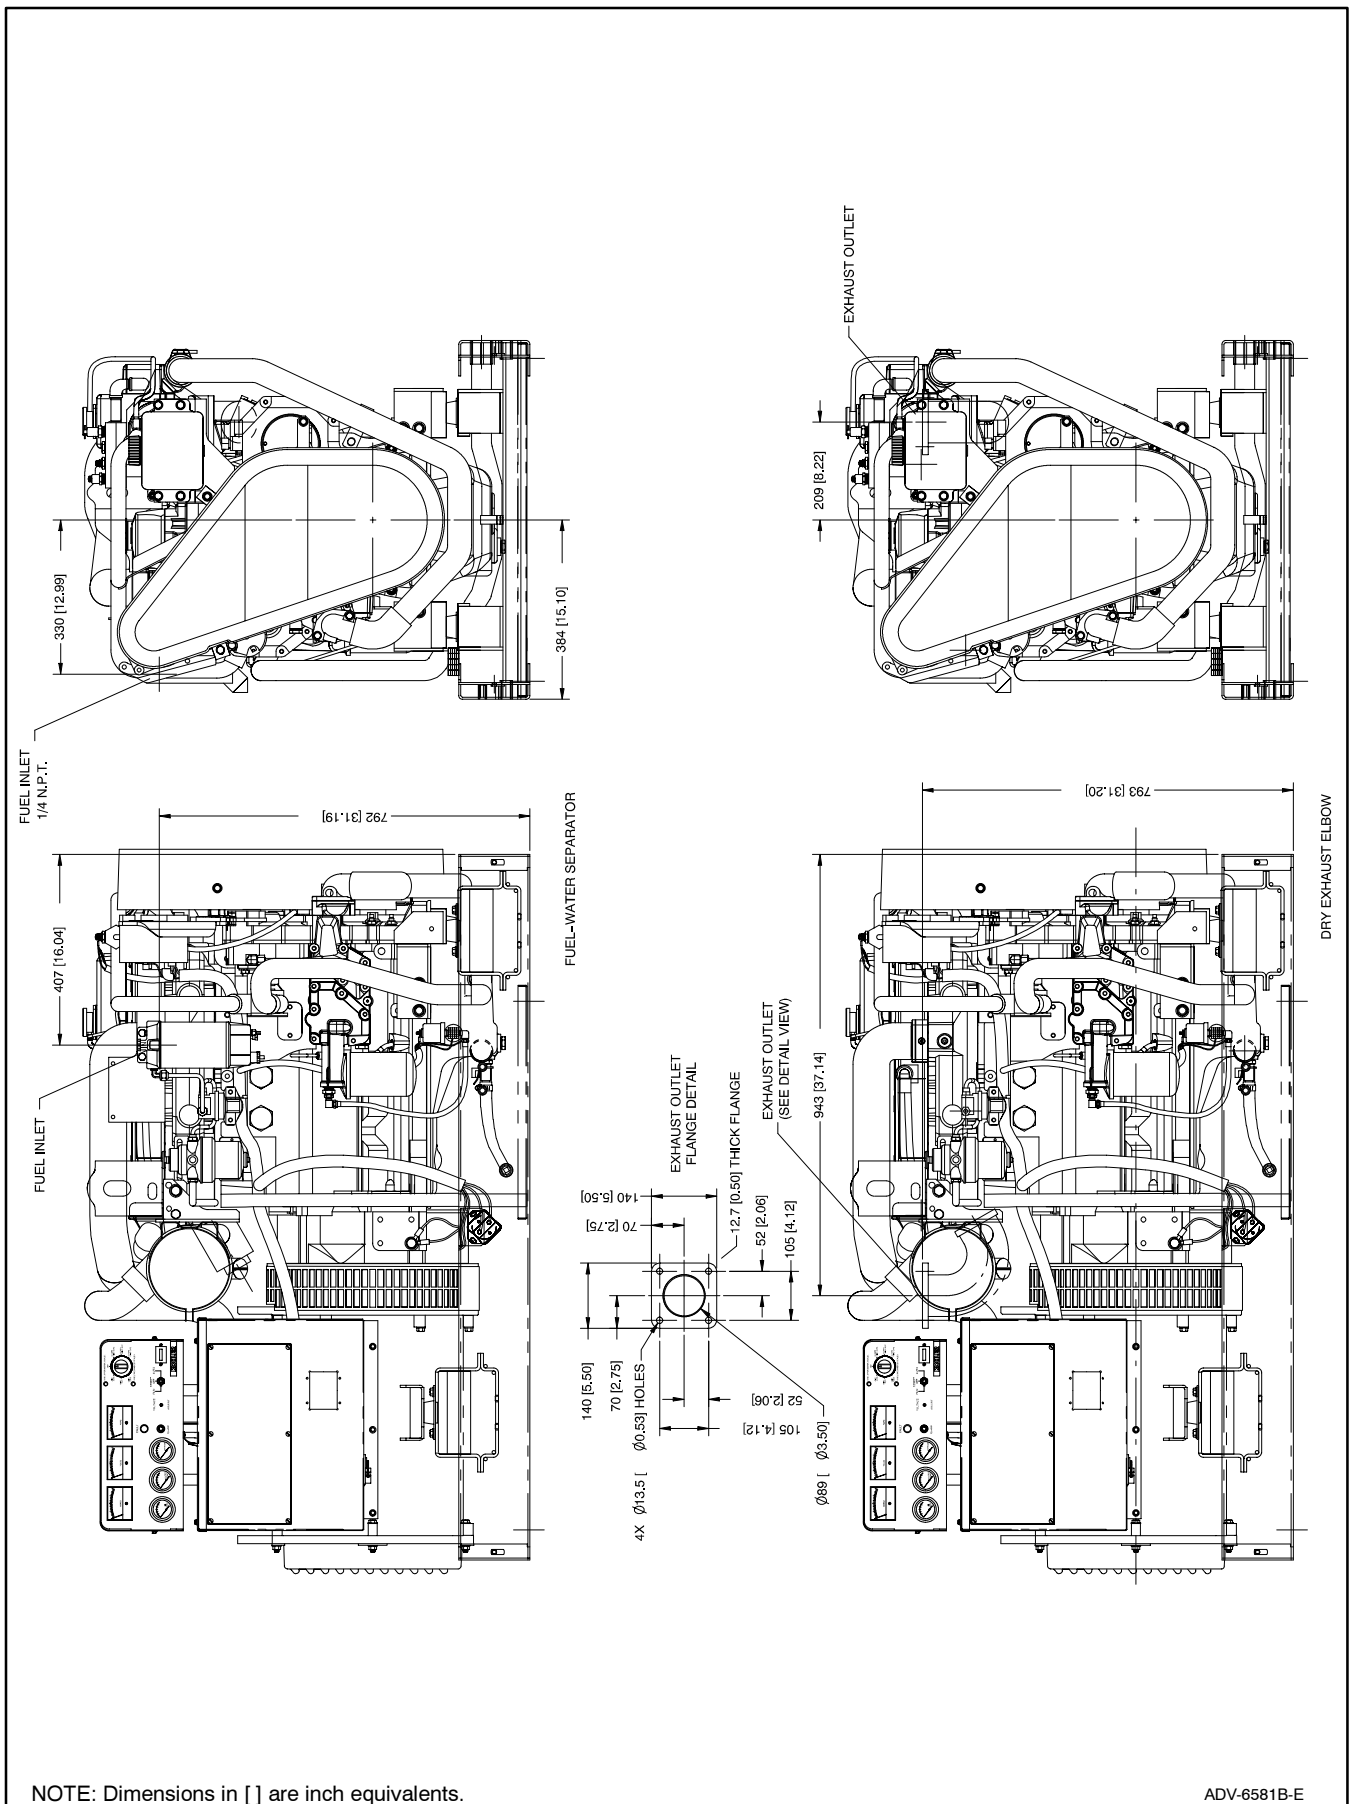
Dimension Drawing, 33EFOZ/40EOZ with Fuel/Water Separator and Dry Exhaust Elbow
